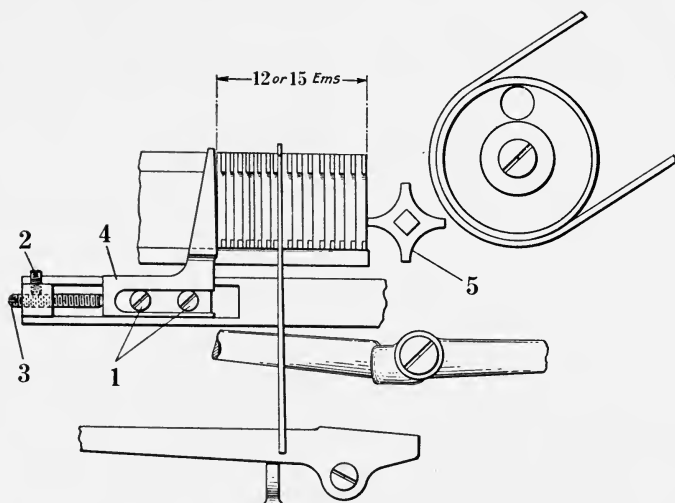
New Style Assembler Slide. Means of adjusting the em measure by the screw 3, so the space between the assembler star 5 and the slide finger 4 will be approximately .014" narrower than the space between the vise jaws. Screws 1 and 1 hold the finger 4 in the slide groove; the binding screw 2 holds the setting of the adjusting screw 3.
